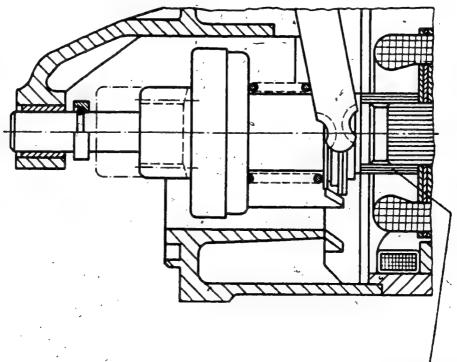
0 001 211 228 with drive-end-bearing housing 1 005 822 306
